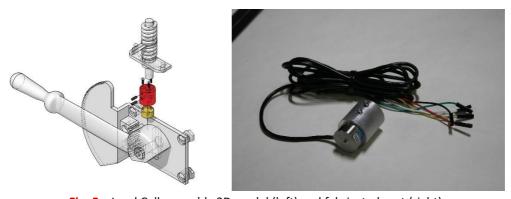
Load Cell assembly 3D model (left) and fabricated part (right)
